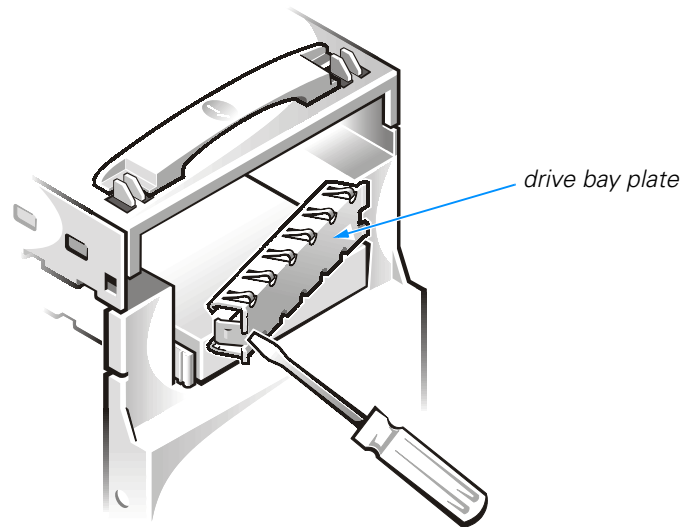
Removing a 3.5-Inch Drive Bay Plate
